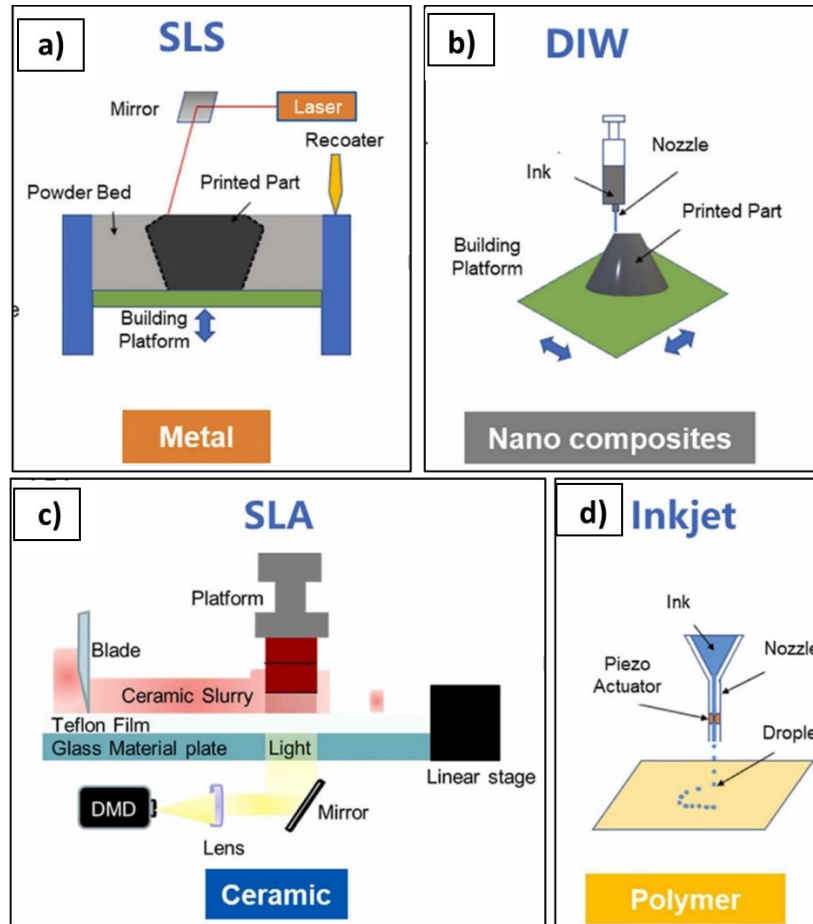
a) Selective Laser Sintering (SLS); b) Digital ink Writing (DIW); c) Stereolithography 3D Printing (SLA); d) Inkjet 3D Printing <sup>[54]</sup>.
